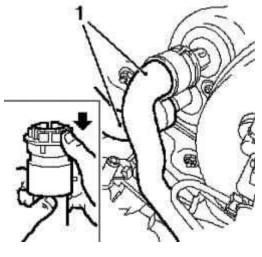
Disconnecting the hoses of the cooling system: 1 - Hoses
